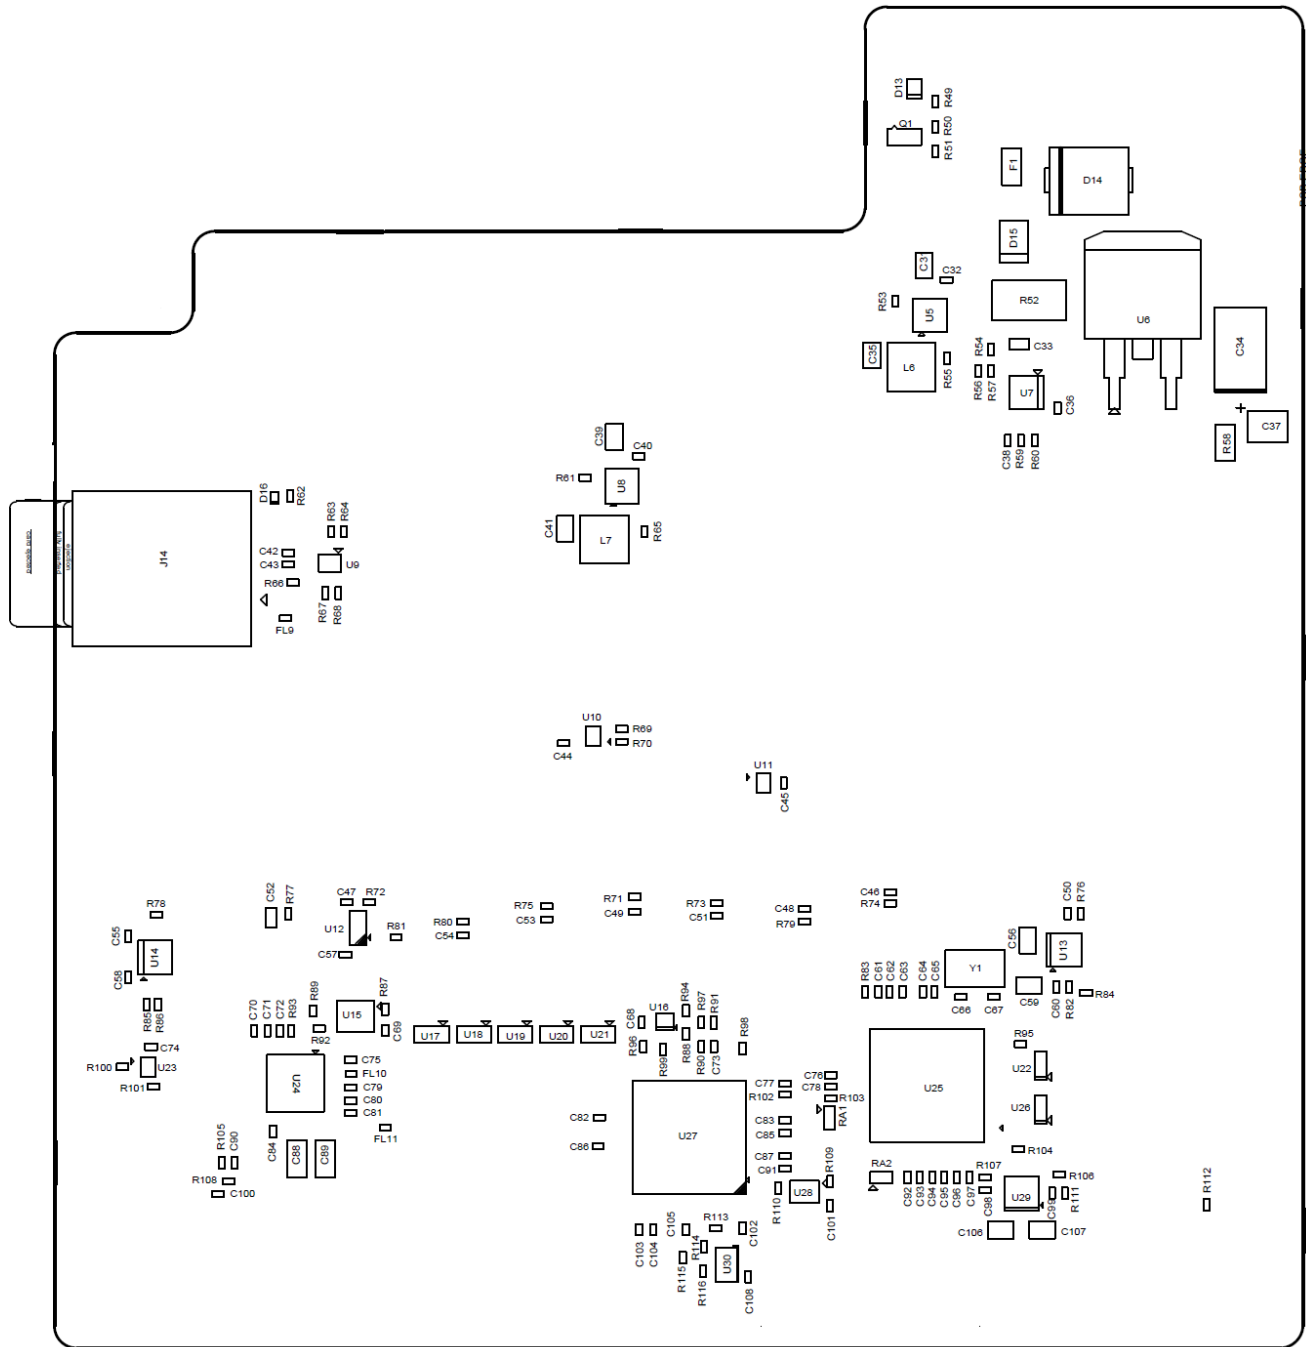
CSK Carrier Card Assembly Layout (Bottom)
